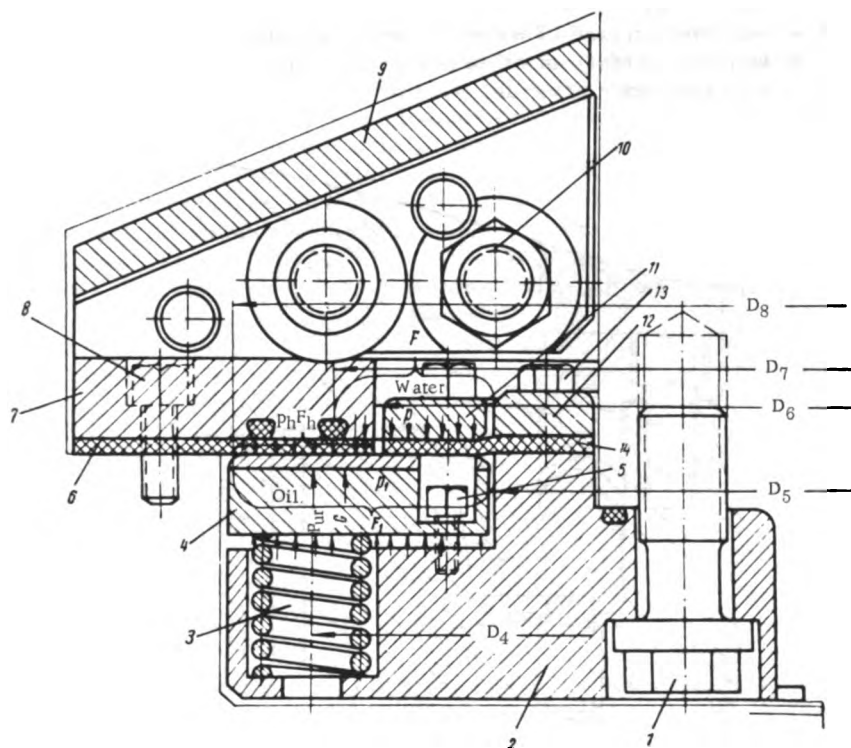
Detachable blade-flange seal with separate springs
